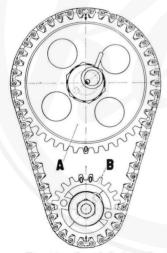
Crankshaft and Camshaft Sprockets with Chain.
